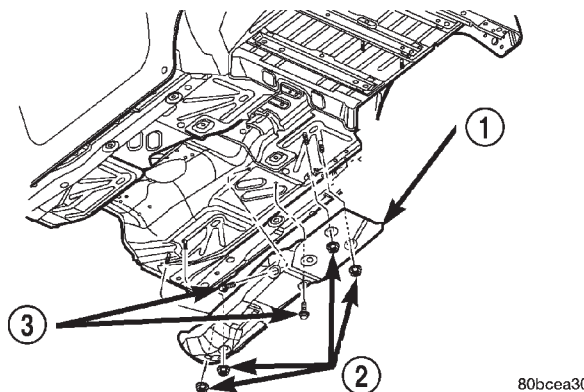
Muffler Middle Heat Shield Removal/ Installation
